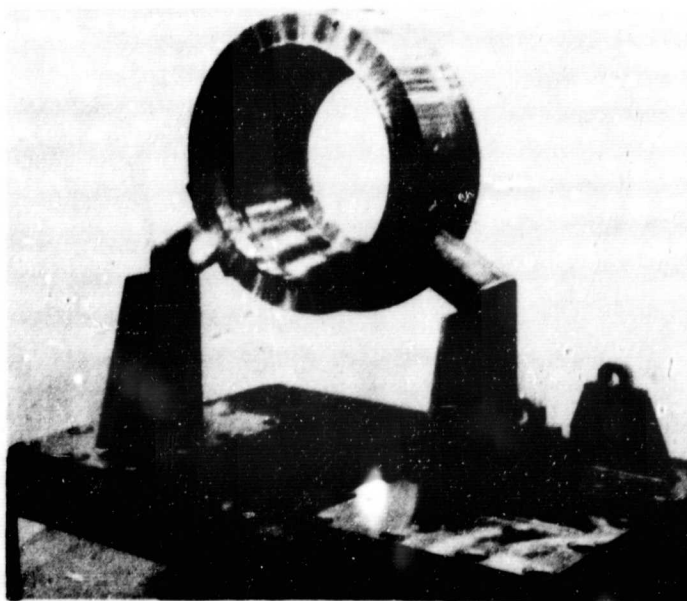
Front Bearing Support for Main Rig Thrust Bearings (XP-84232)
